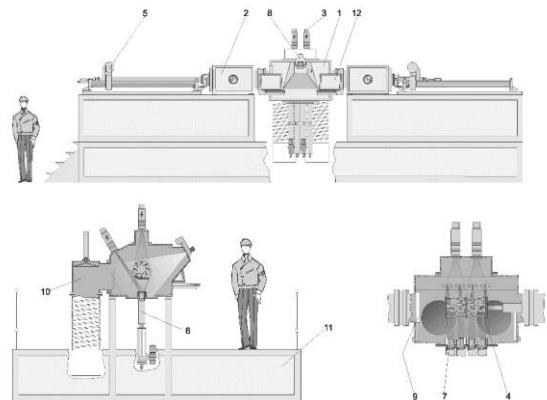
General view of the L-9 unit and the coating deposition scheme:
